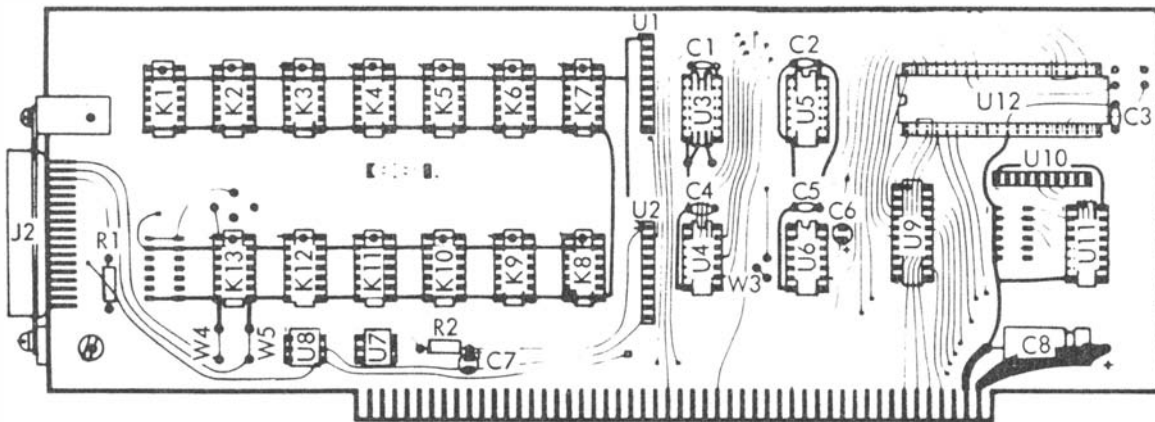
General Handler Interface Circuit Assembly (P/N 47895)
